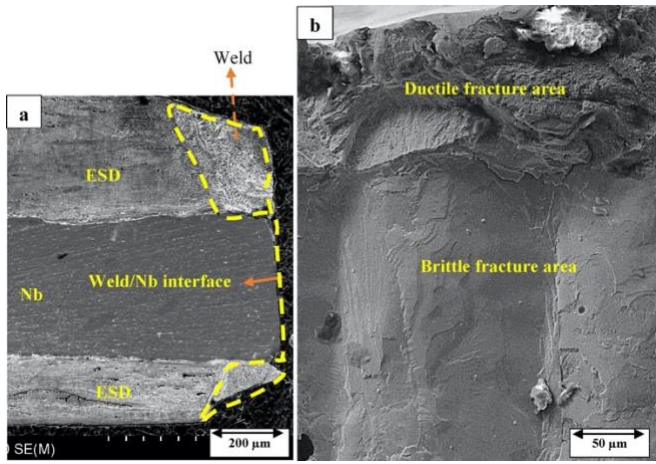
Fractography images of 0.5 mm interlayer thickness weld, a- cross section of fracture path, b- fracture surface morphology.
